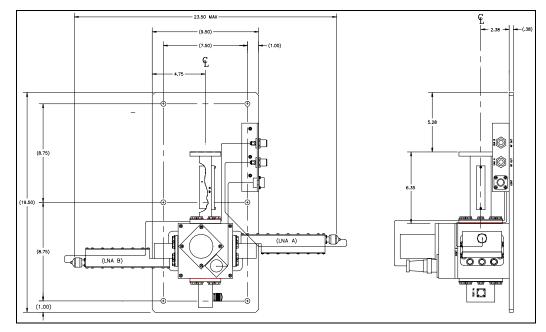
Standard Redundant Configuration Dimensional Requirements
